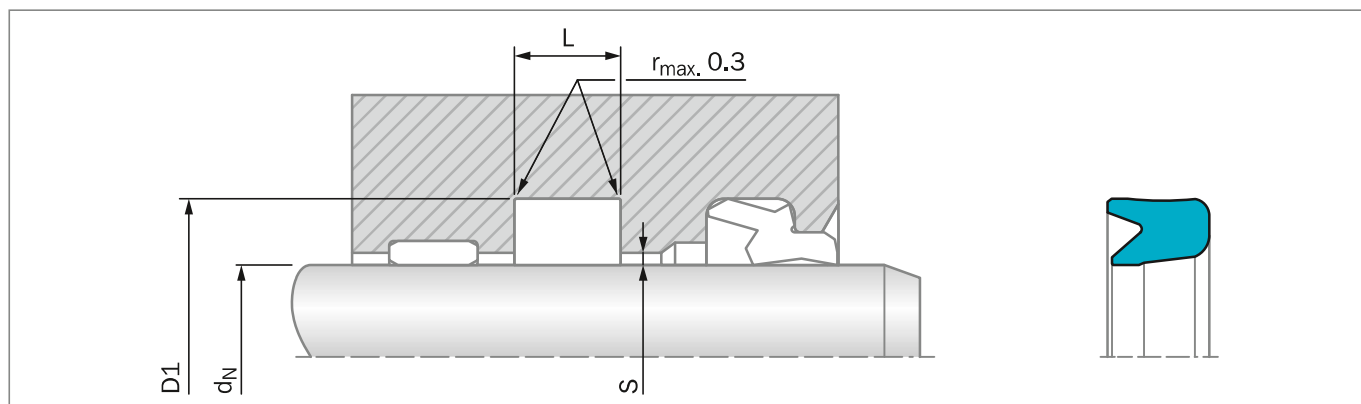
Installation Drawing, Dimension "S" see Figure 55
